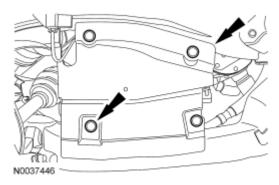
Locating Pin-Type Retainers & LH Splash Shield Courtesy of FORD MOTOR CO.
